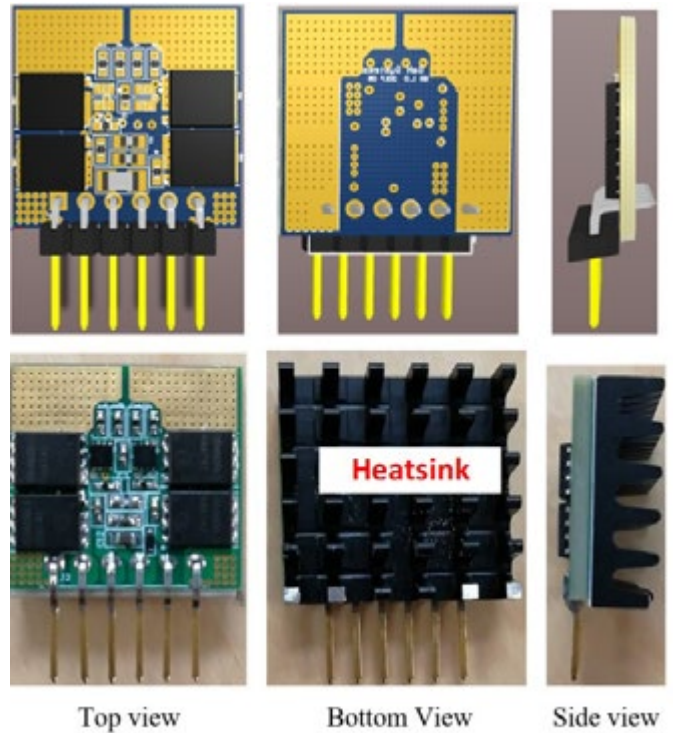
Secondary side synchronized rectifier daughter card PCB layout (left) and pictures (right)
